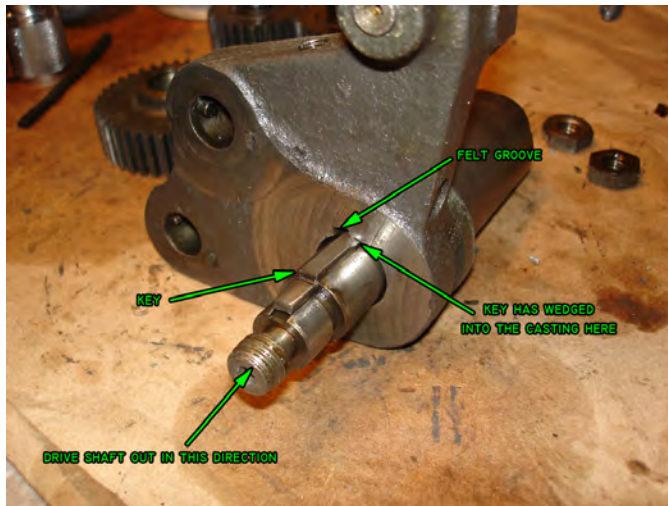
Reverse gear train showing how the main shaft key was improperly installed and damaged.
